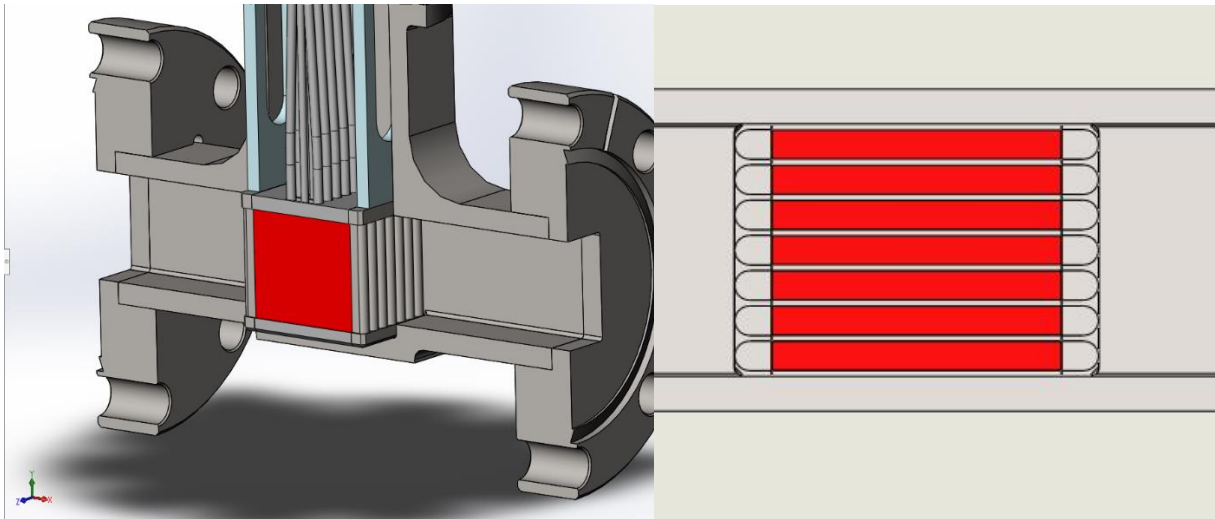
Cut away view of heater housing with heaters (left) and top cross sectional view of heaters and flow channel features (right)
